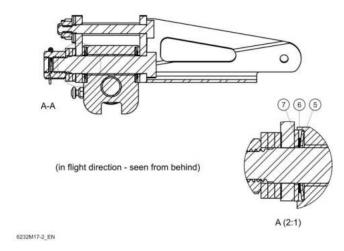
Arrangement of spring and shim washers on gimbal head – Version II
